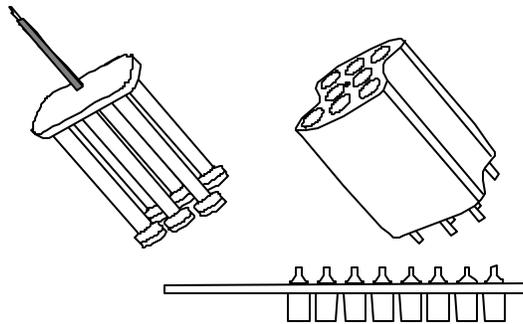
Removing Piston/Cylinder and Manifold Assemblies
